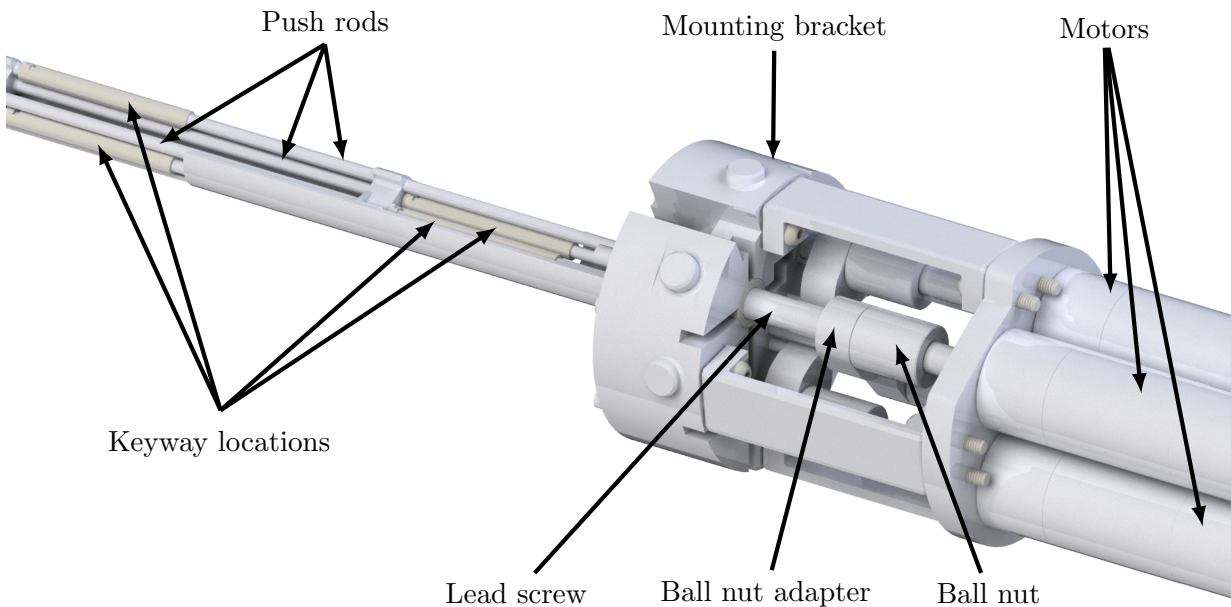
Motor and lead screw assembly at the proximal end of the tool.
